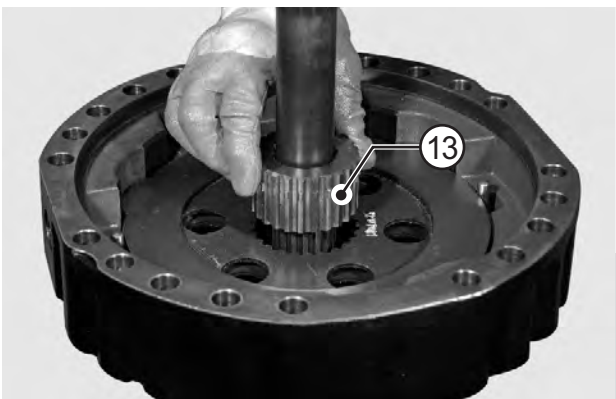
Remove the flange (13) complete with the discs. Write down direction of assembly.
